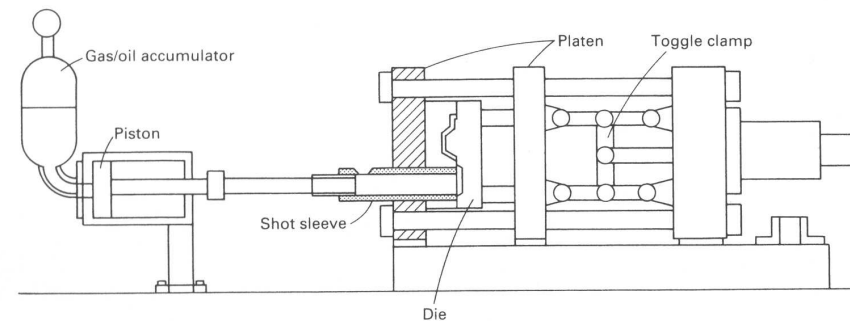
Schematic showing the principal components of a cold chamber die casting machine
